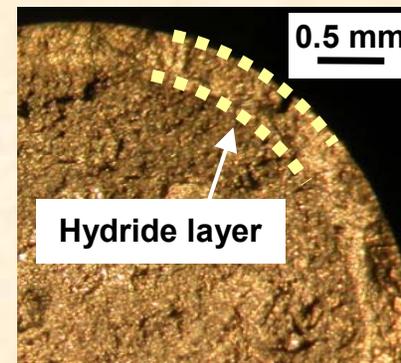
A cross-sectional fracture surface (quadrant) showing a hydride layer with a thickness of about 400  $\mu$ m at the surface of the specimen.
